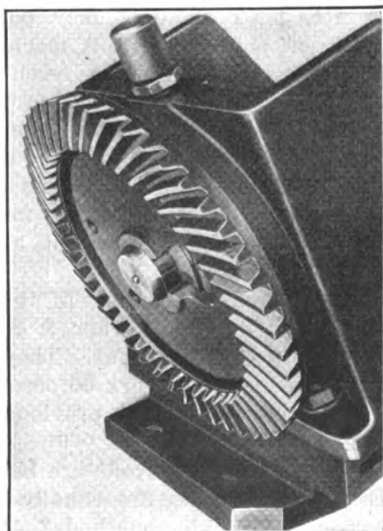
HEAD FOR HOLDING SPIRAL BEVEL GEARS
